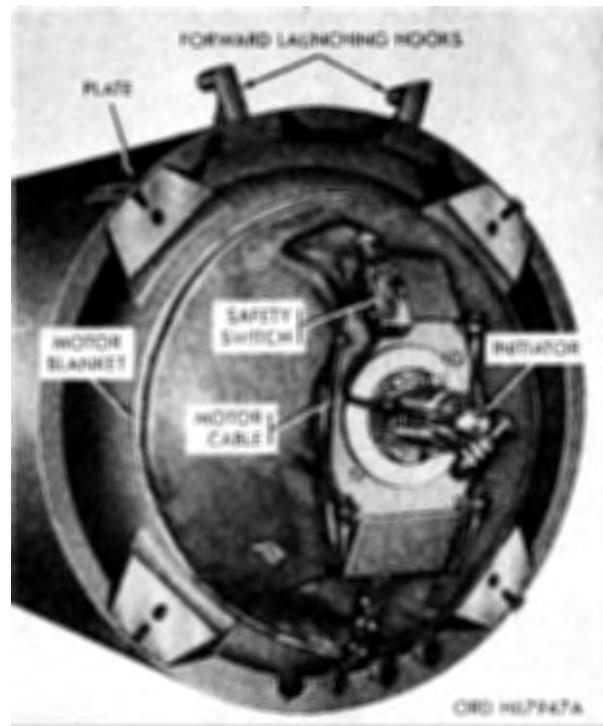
ROCKET MOTOR XM100 - FRONT VIEW.
